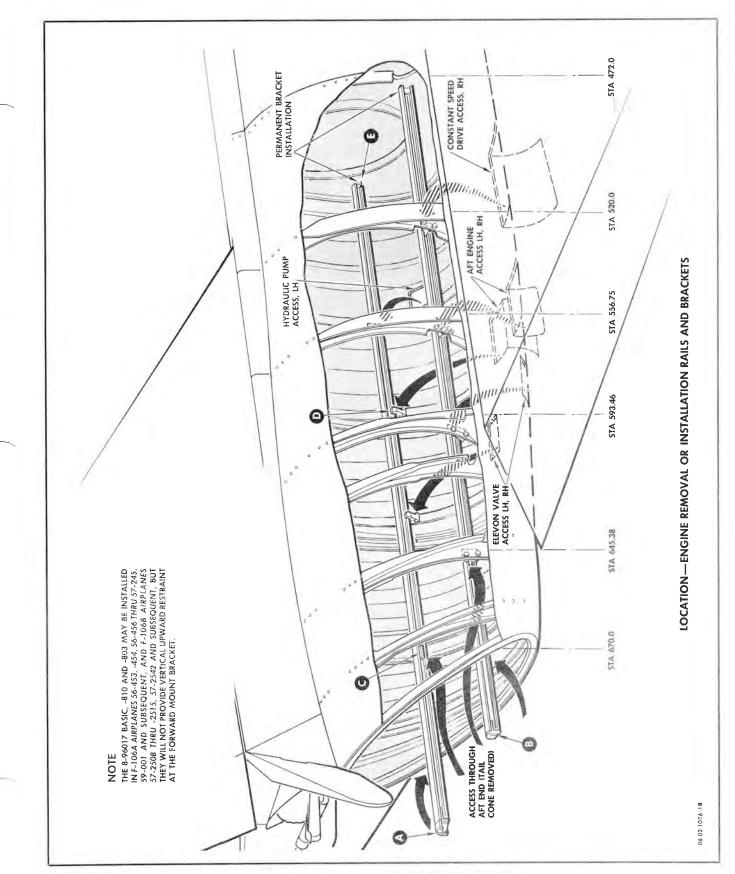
Engine Replacement, Rail and Bracket Installations, 8-96017-805 (Sheet 1 of 2) Applicable to F-106A airplanes 56-453, 56-454, 56-456 thru 57-245, 59-001 and subsequent, and F-106B airplanes 57-2508 thru 57-2515, 57-2542 and subsequent
